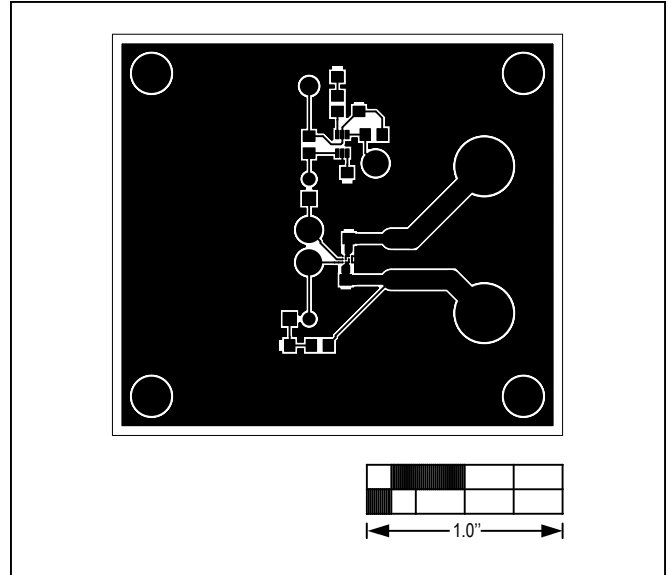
MAX14653–MAX14655 EV Kit PCB Layout—Component Side
